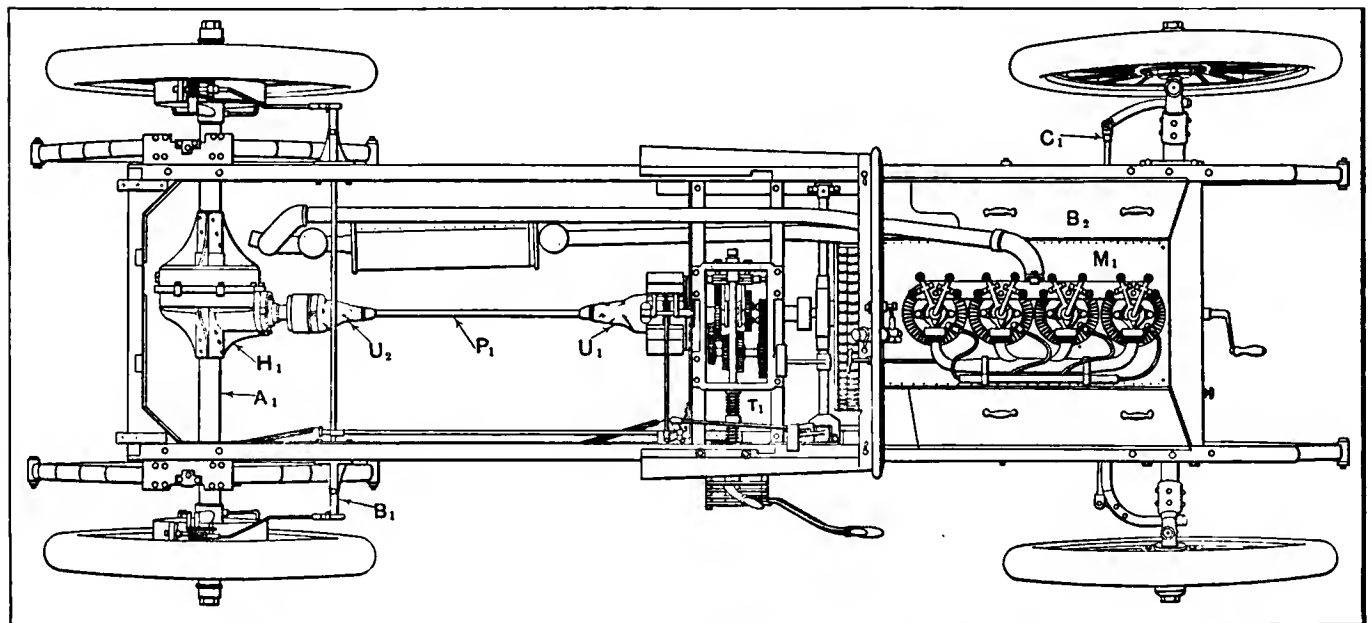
Plan of a 4-cylinder motor mounted on a Franklin chassis with wooden side frames and full elliptic springs
